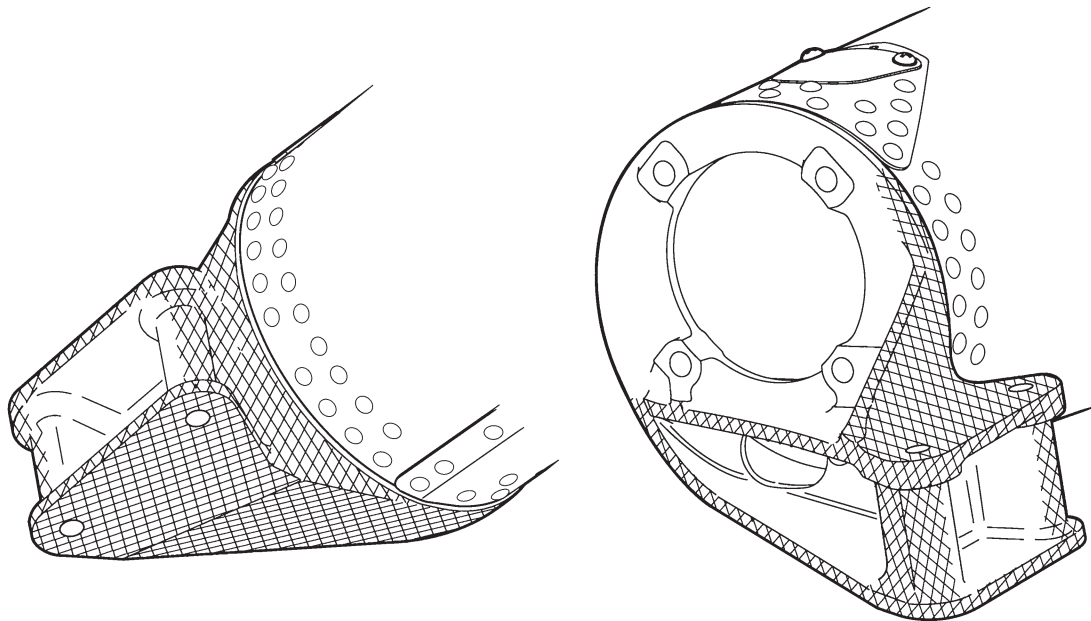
PENETRANT INSPECT CROSS-HATCHED SURFACES OF C148 BULKHEAD
